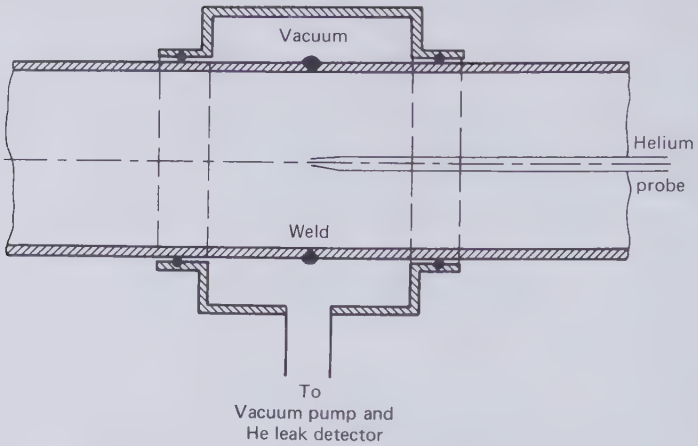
Clamp-on vacuum leak detection in pipeline welds.
